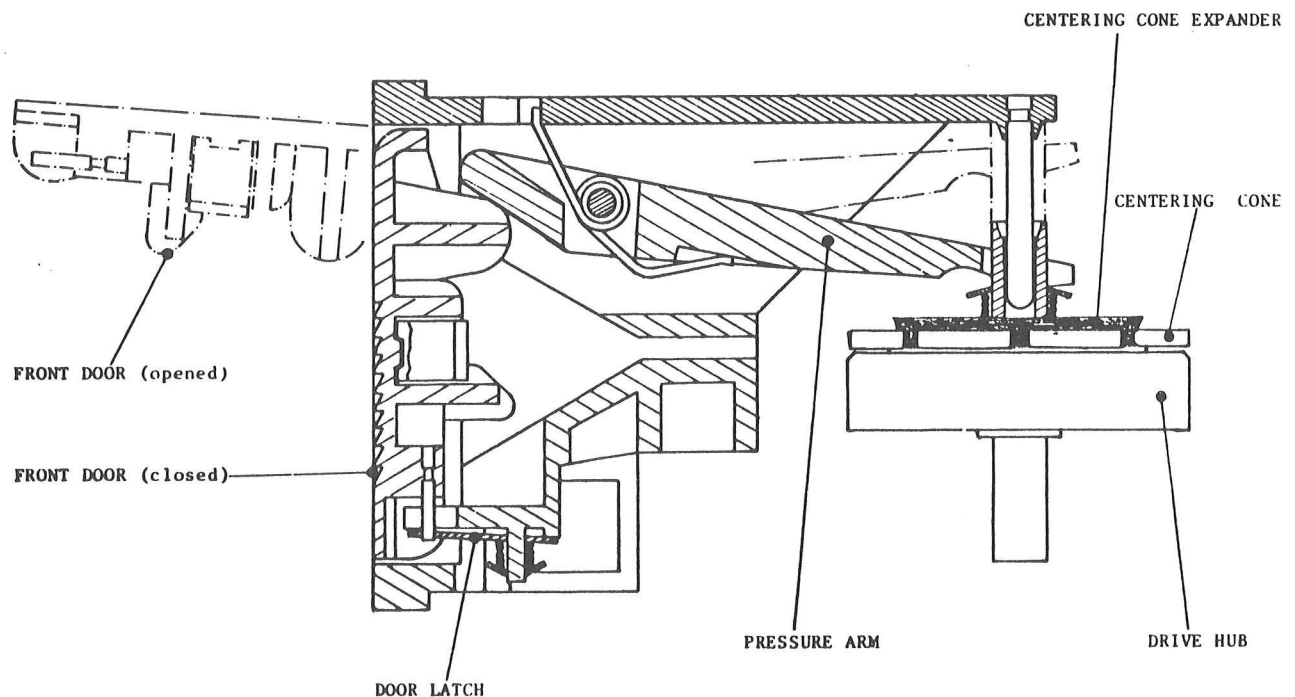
1 : SPINDLE AND FRONT DOOR MECHANISM
